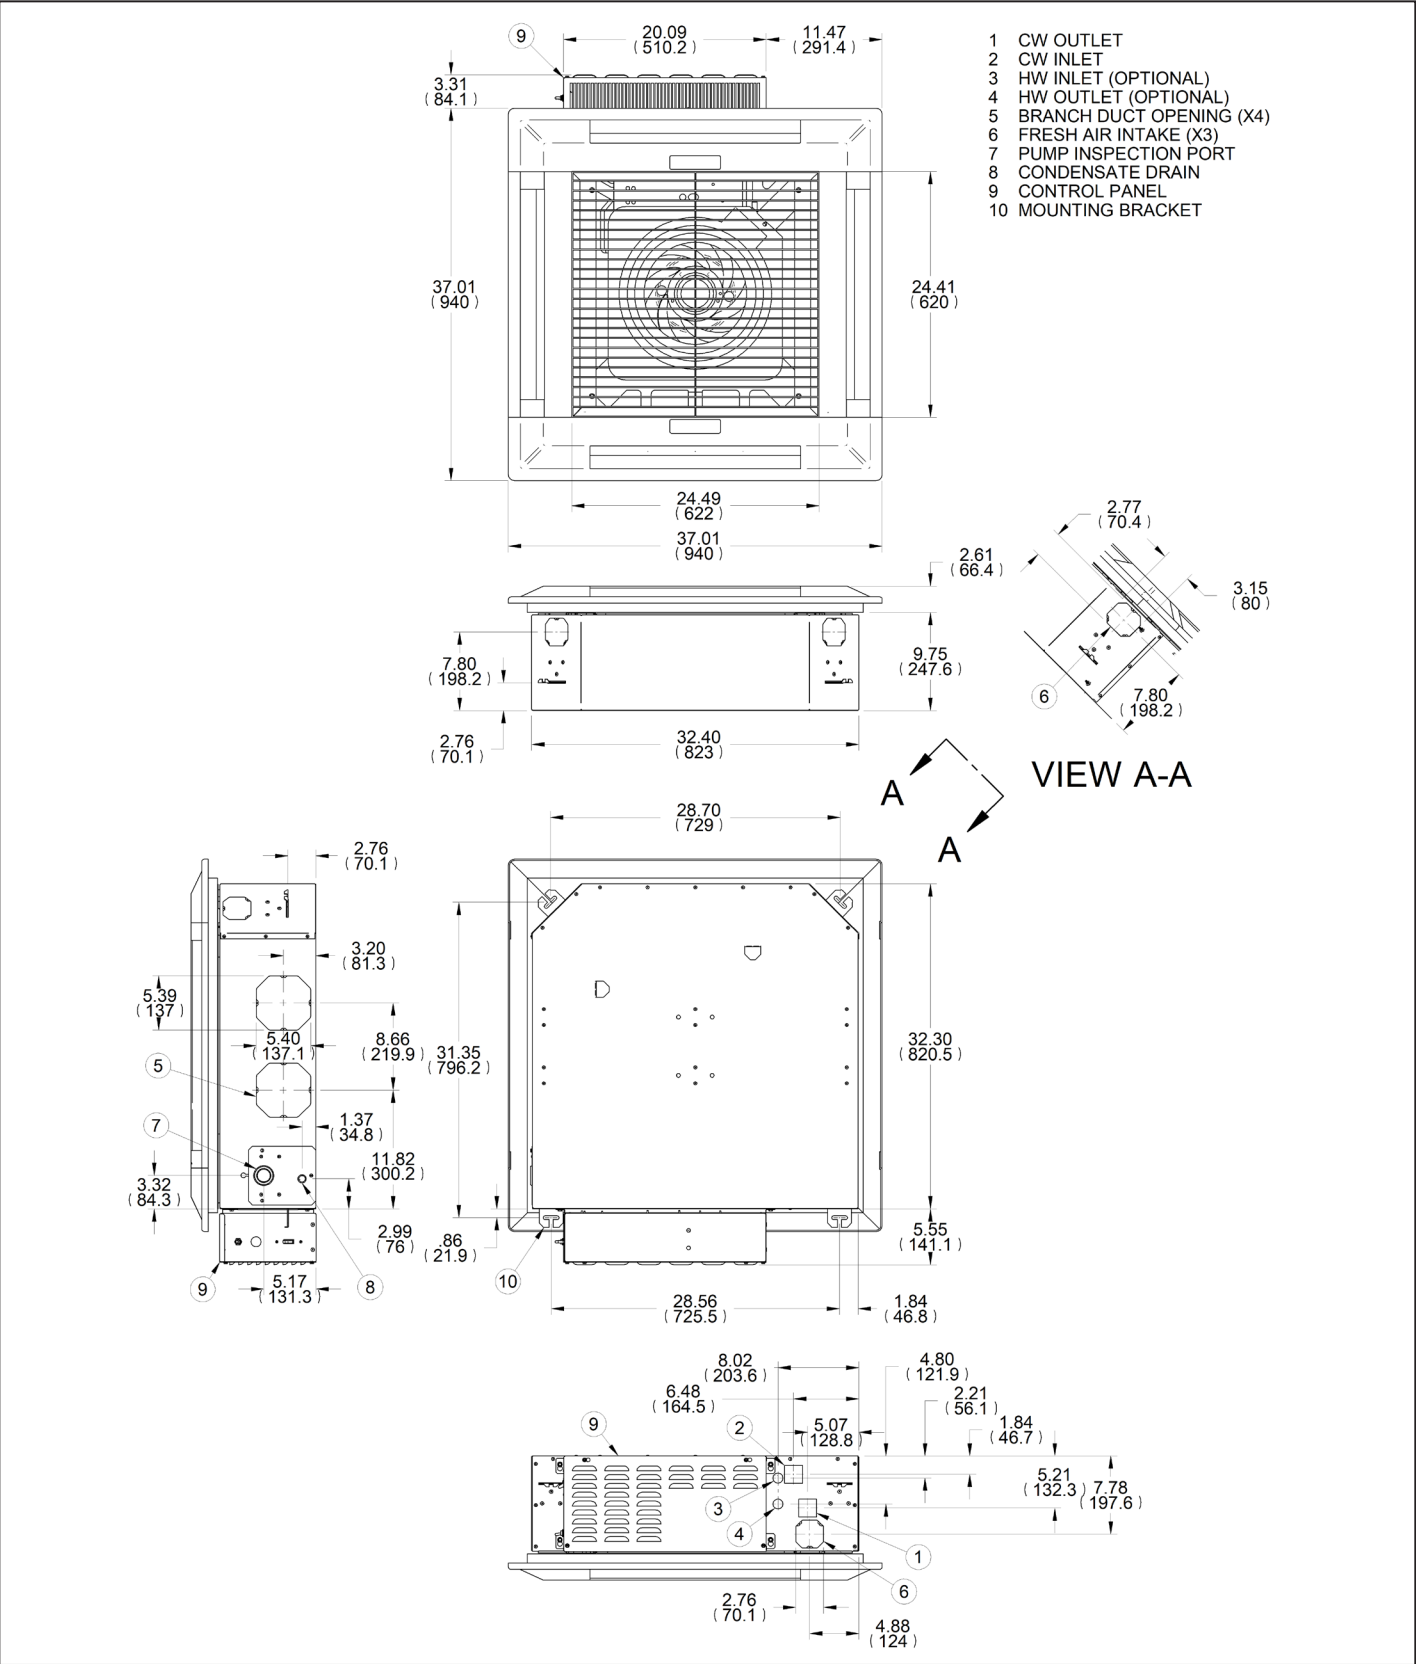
Dimensions – Small Chassis: Chilled Water Units – Size 08 and 12
